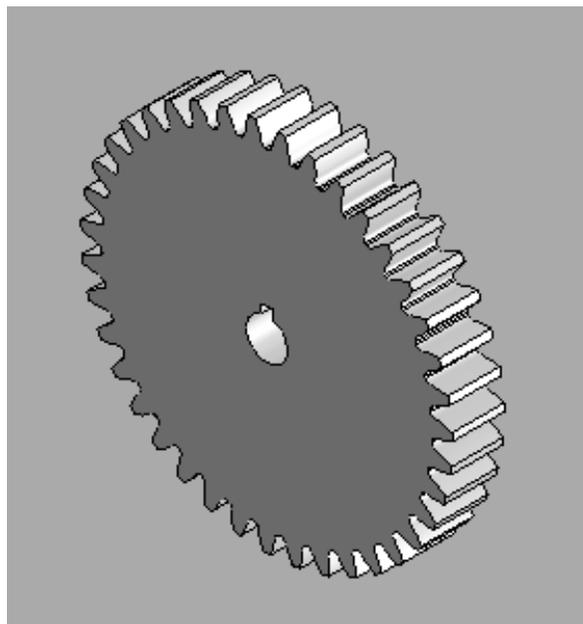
Spur gear with the teeth parallel to rotational axis.
